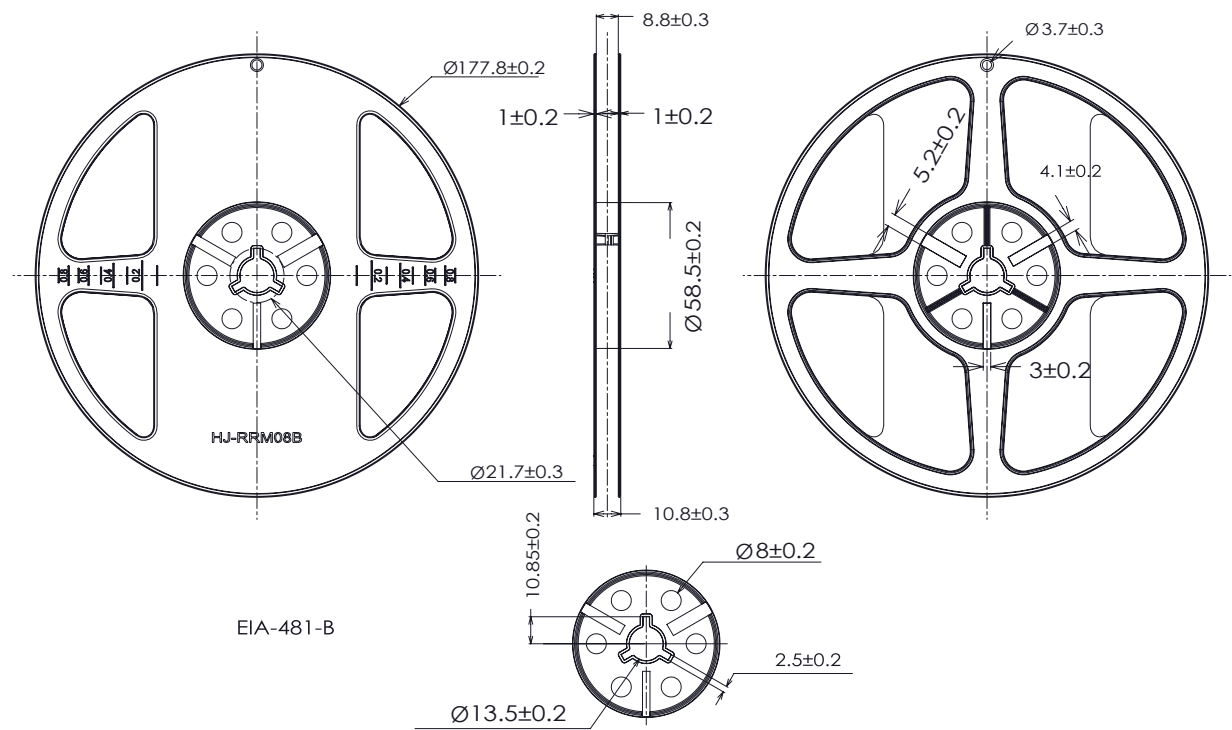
Reel dimensions for LUXEON 2835 Commercial Deep Dimming
